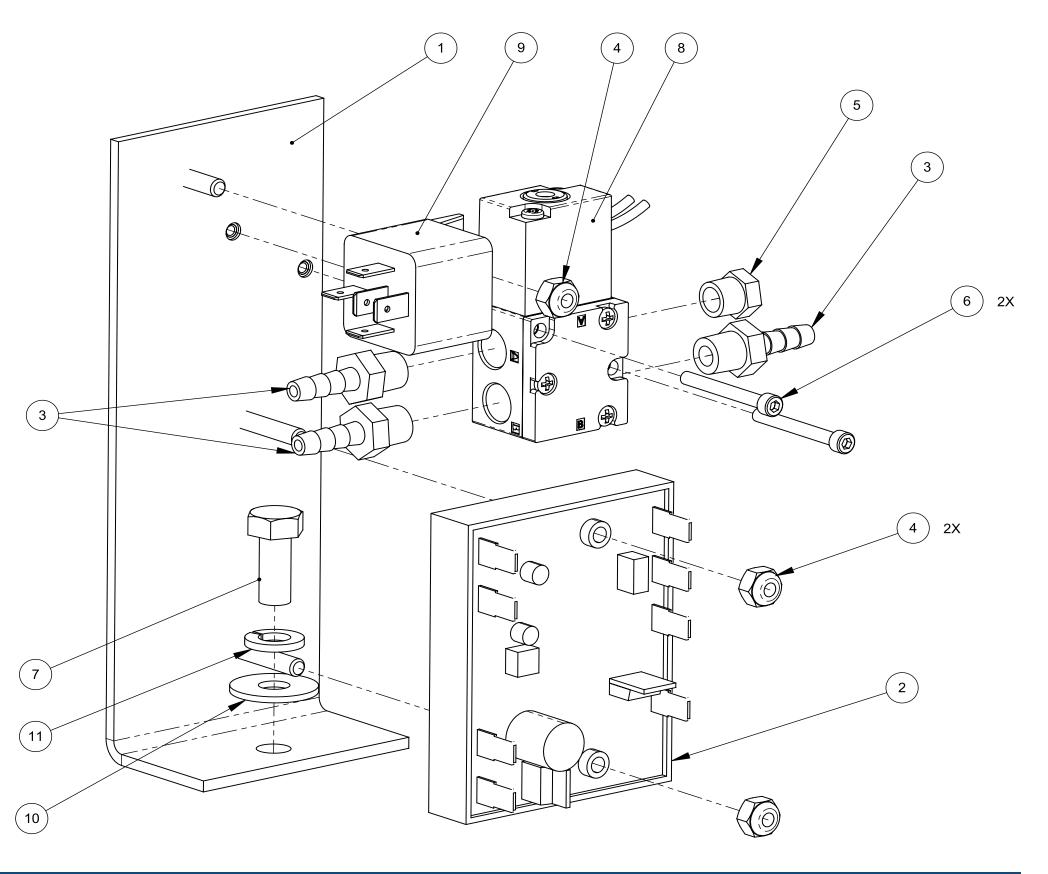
Solenoid Valve Assembly 610-026-747 Rev. B
